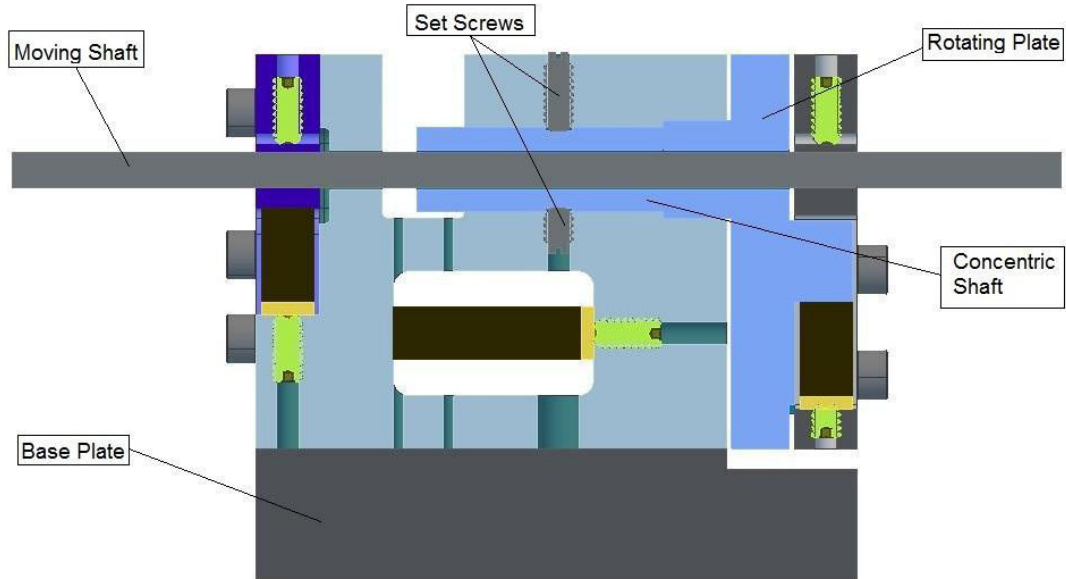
Fine adjustment of the component misalignment using set screw
